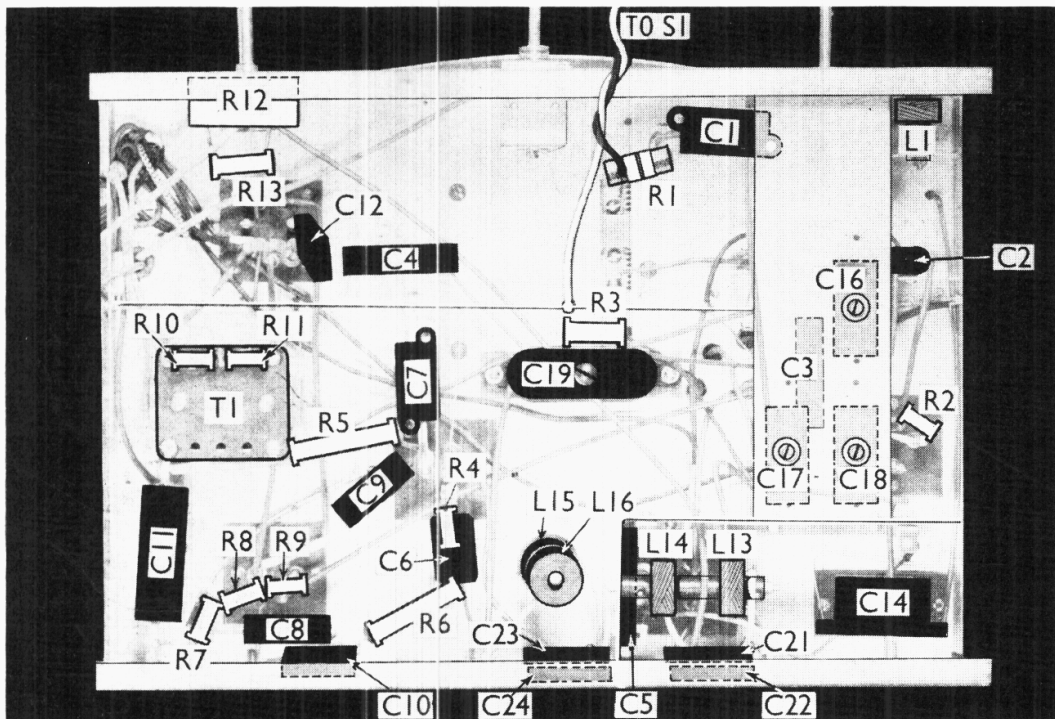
Under-chassis view. The cross-bars and the screen over the bottom right-hand corner have been removed. Beneath the plate carrying C16, C17, C18 is the switch assembly, shown separately on this page. C3 is below this assembly. C2 is formed by two wires twisted together. C21, C22, C23 and C24 are pre-set condensers fixed to the back of the chassis.
